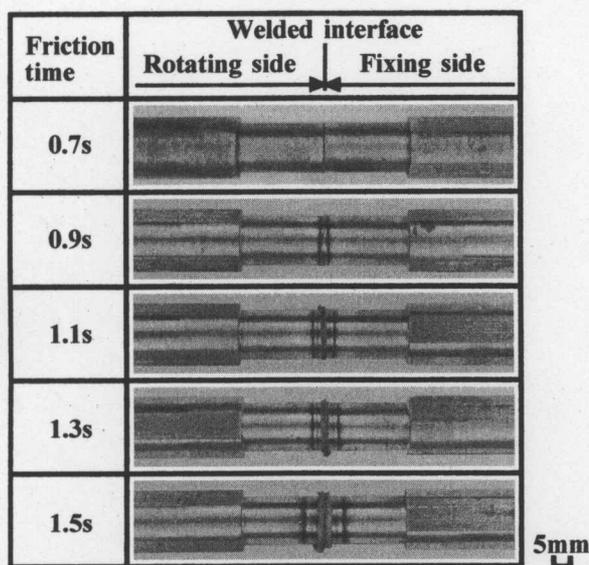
Appearances of welded joints after welding in friction pressure 30 MPa and friction speed 27.5 s^{-1}
